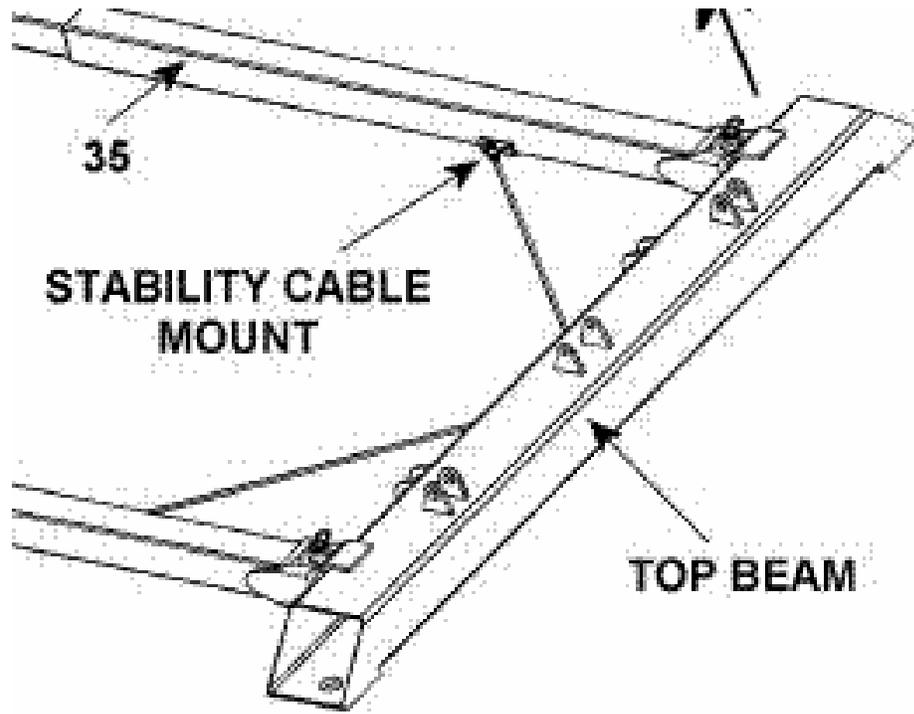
Steel cables added between the upper beam and vertical tubes
